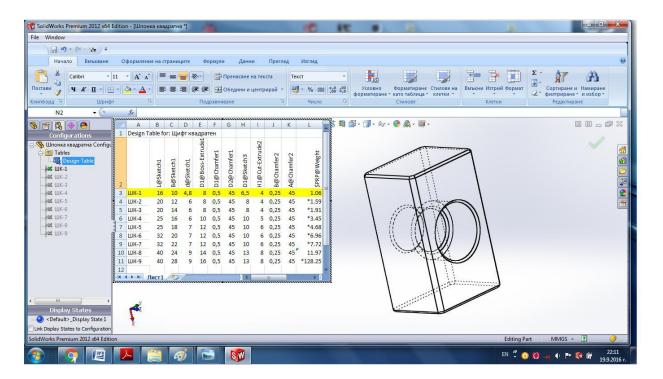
Parameterization of the dimensions of the BE and the attributes of the dimensions for different BE configurations
